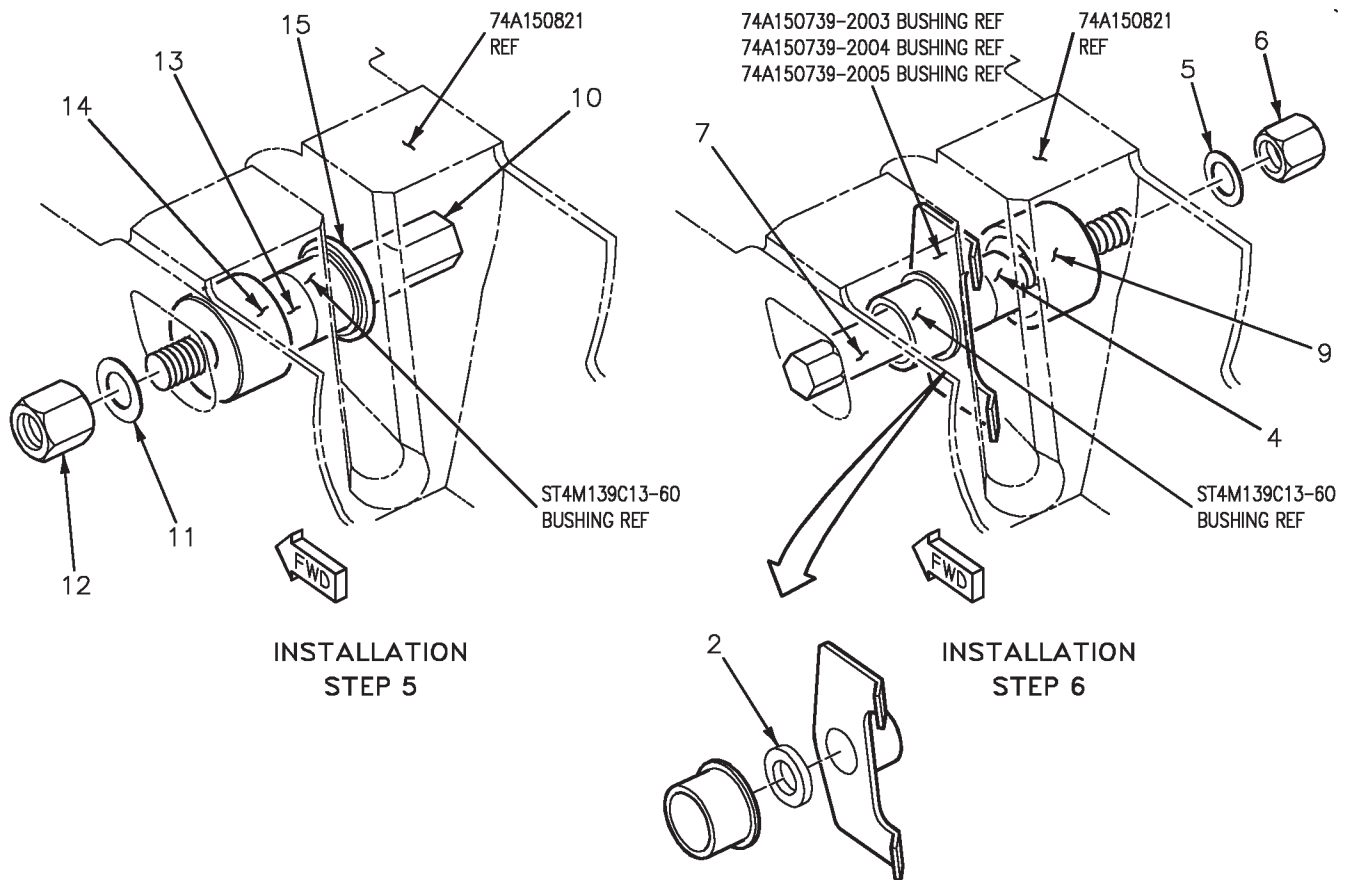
Bushing Removal, Installation, and Reaming (Sheet 19)
